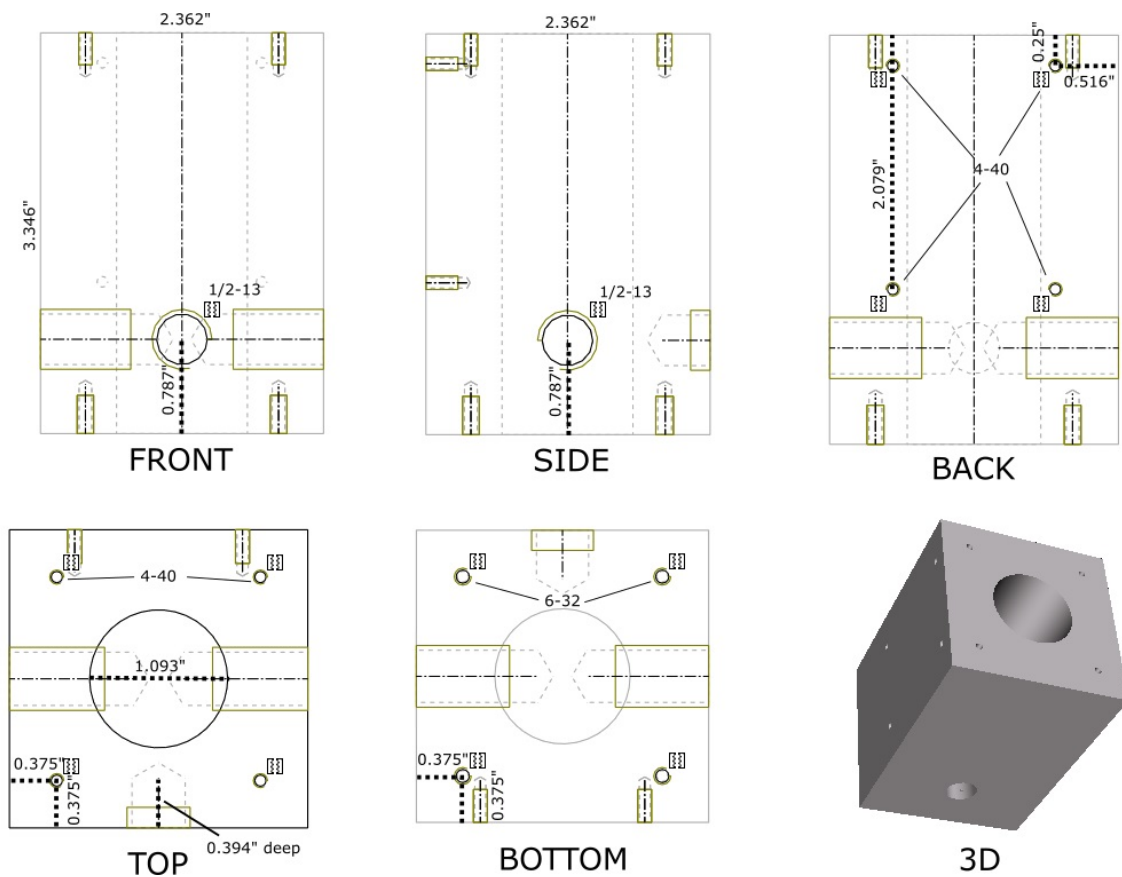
Custom “holder” machined part manufactured by eMachineShop. Holder houses vial houses Chemglass CG-4902-08 40 mL vial containing bacterial culture, with 1/2”-13 mounting holes for measurement components in the sides. Temperature control is achieved using a Peltier heat pump mounted on the back and a temperature probe mounted in a 1/2”-13 nylon screw in thermal contact with the holder mounted in front. Side 1/2”-13 mounting holes allow attachment of a matched IR LED-photodiode pair for optical density measurement. 6/32 holes at bottom mount to machined “plate” part.
